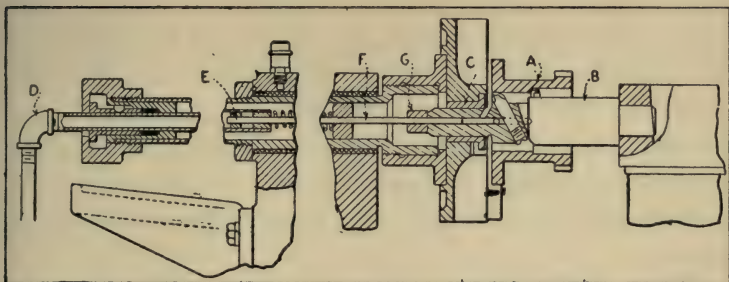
LUBRICATION OF SPECIAL NATURE APPLIED TO A TURRET LATHE
